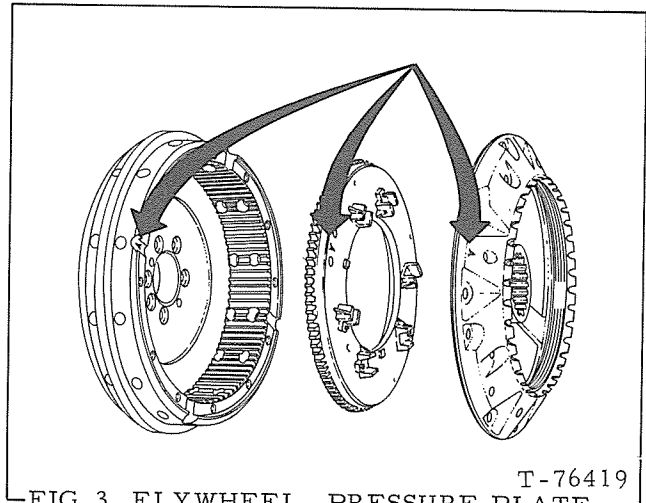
FLYWHEEL, PRESSURE PLATE, AND BACK PLATE ALIGNMENT MARKS "A"
